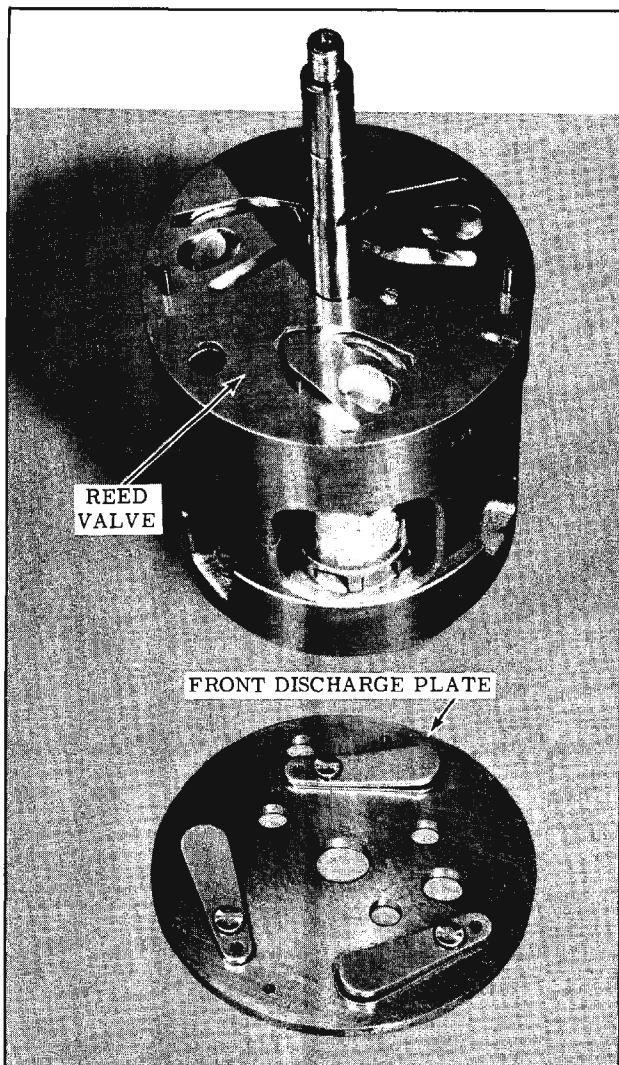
Front Head Discharge Plate and Reed Valve
